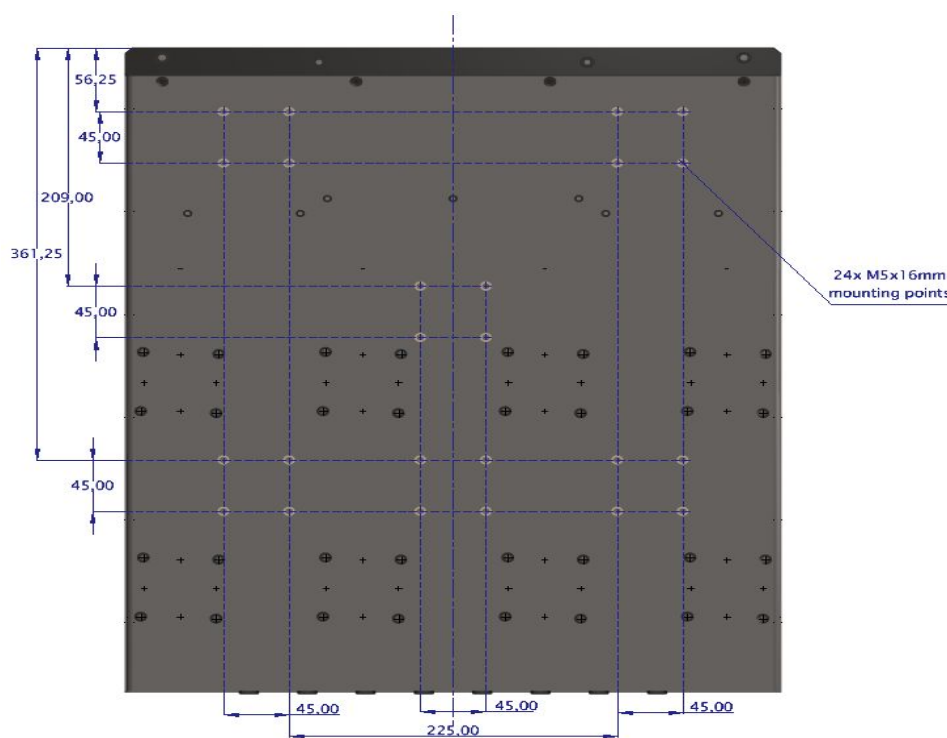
Coral 144 bottom dimensions with M5 mounting points
